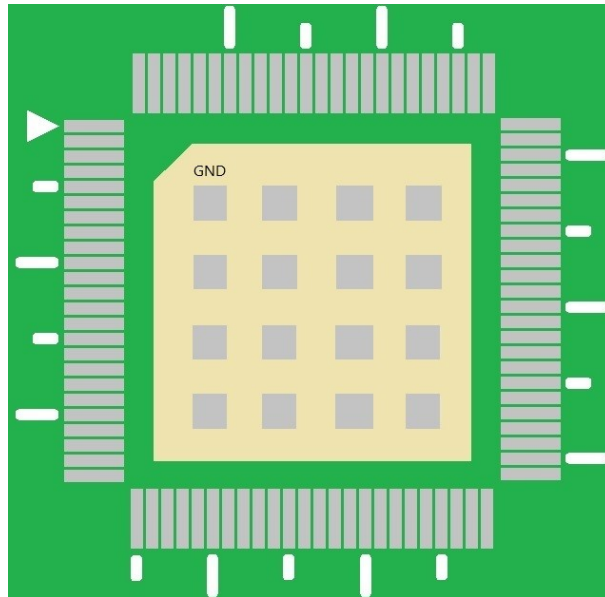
Design Suggestion-1 for LT7589A Bottom Pad PCB Layout
